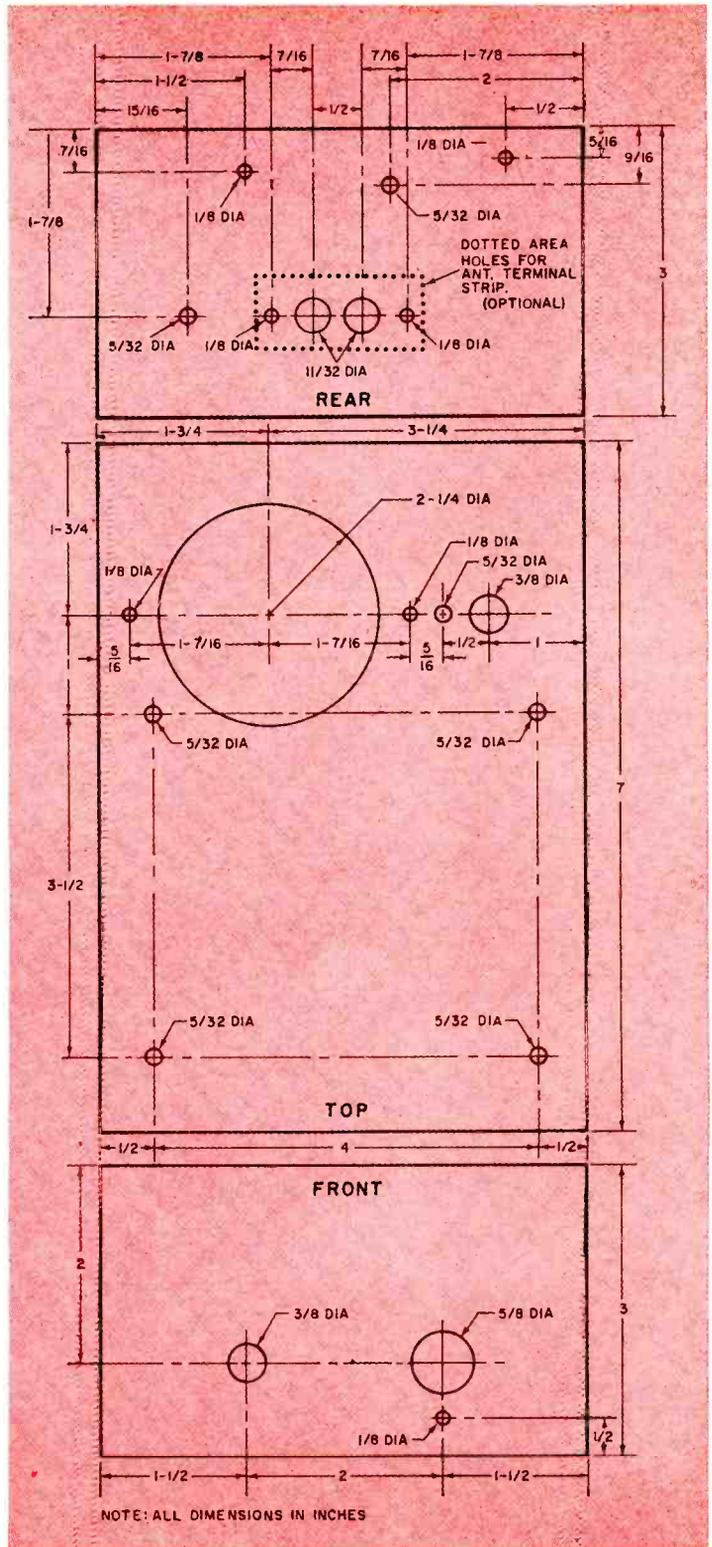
To avoid unwanted interactions, mounting holes should be drilled to conform with dimensions and locations shown in the drawing (at right).
